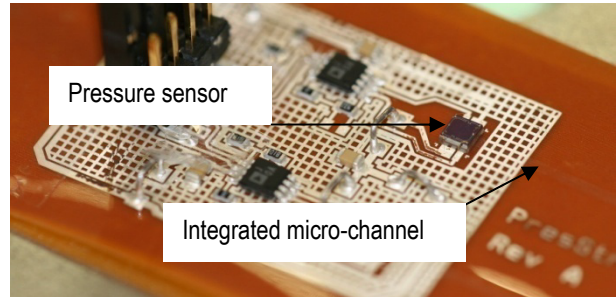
Pressure sensor on flexible PCB manufactured at Epigem
